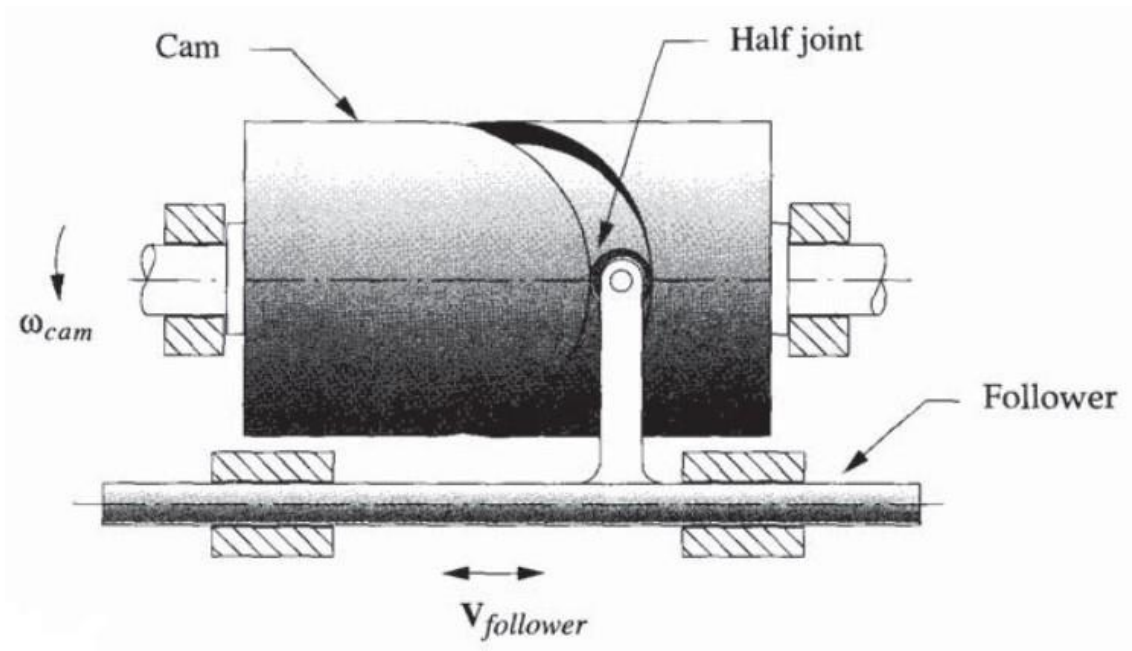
Cylindrical/barrel groove cam with a translating follower [55]
